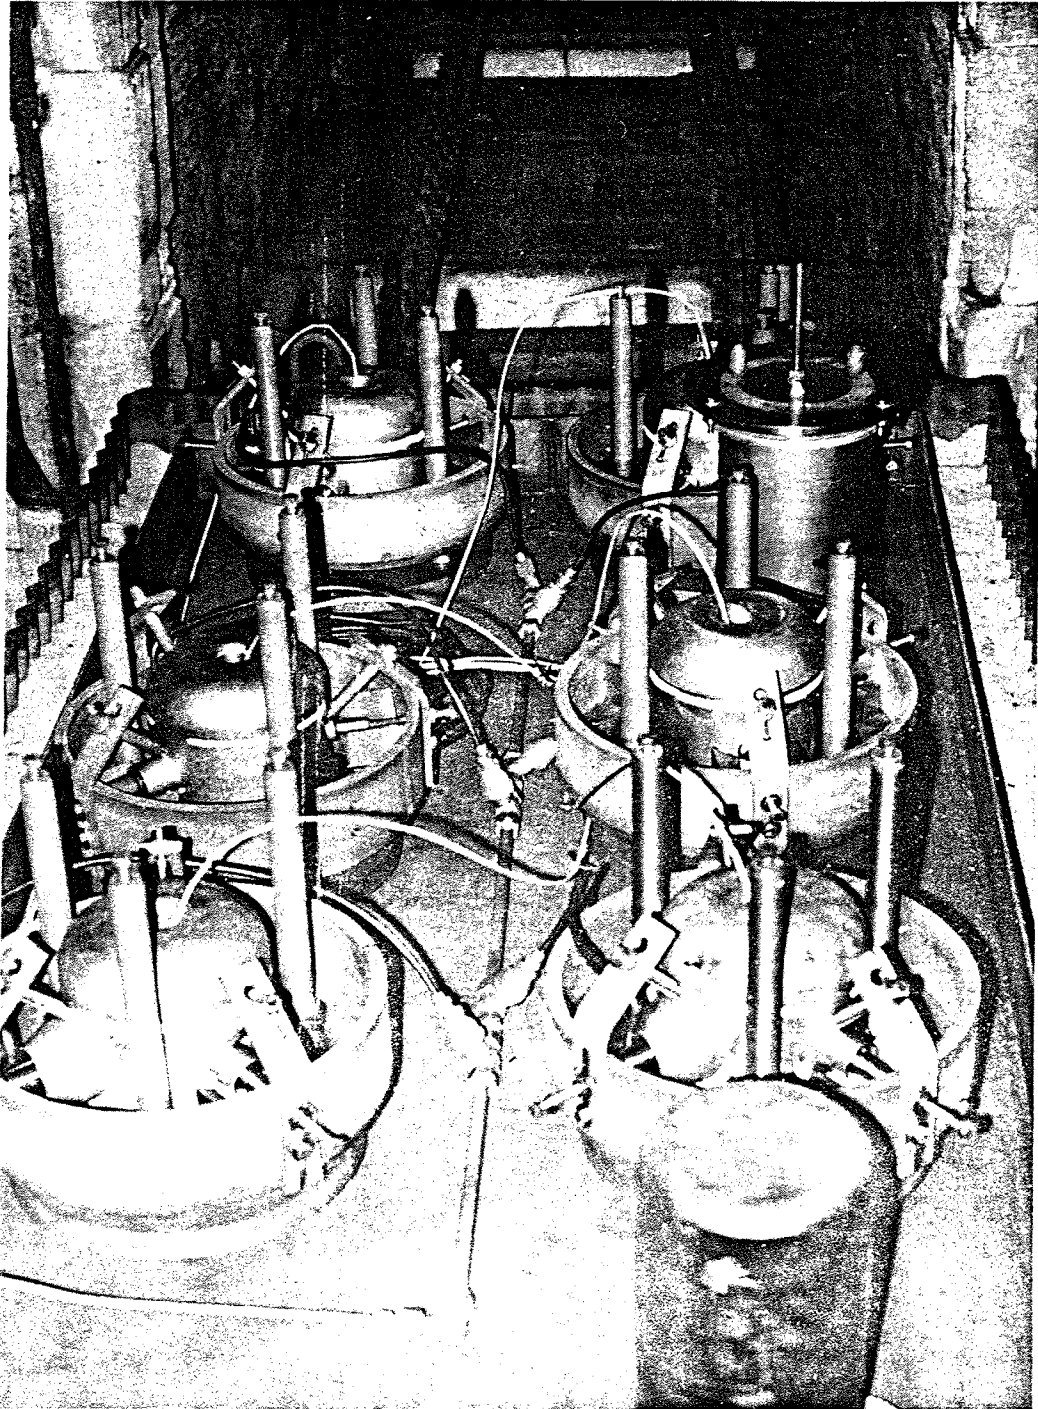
c.2 Furnace loaded with drift tubes.
